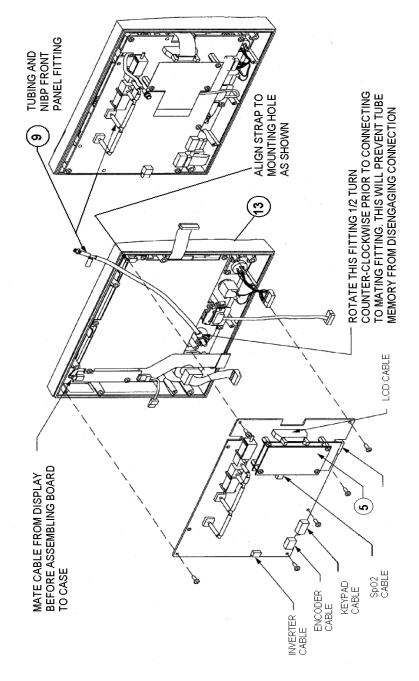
A3 Front Case Assembly Drawing (1 of 2)
